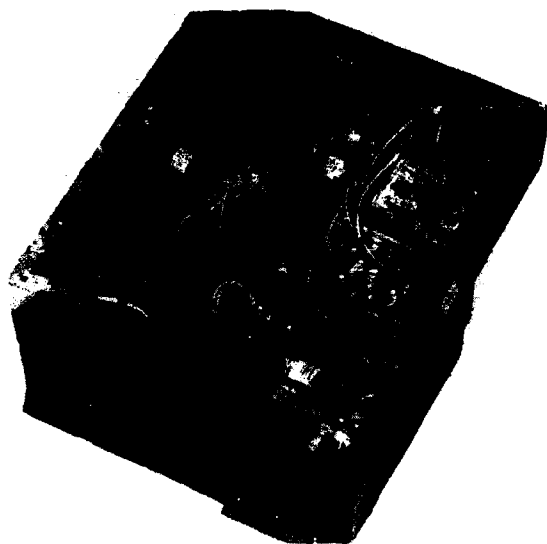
CORRODED A-6 POWER SUPPLY SUBASSEMBLY
